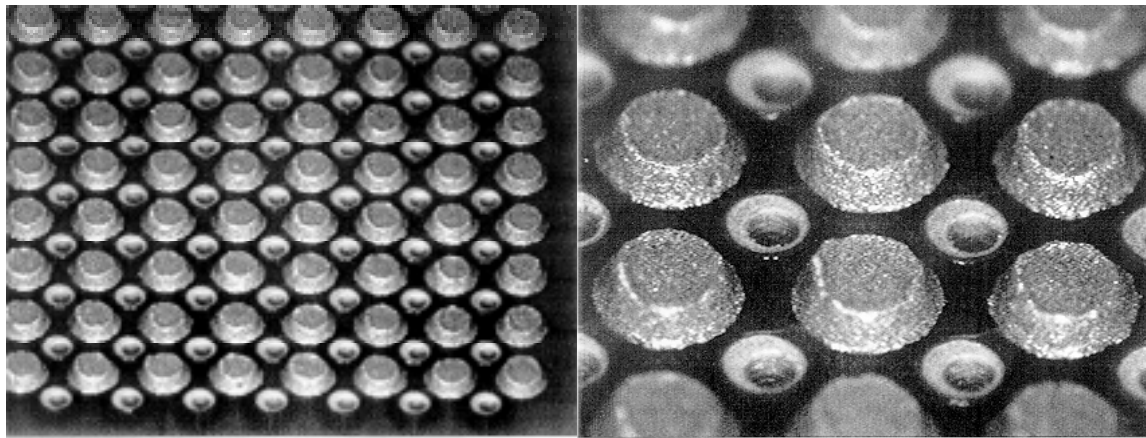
Proper Solder Paste Deposit (courtesy AMKOR/ANAM/IBM)
